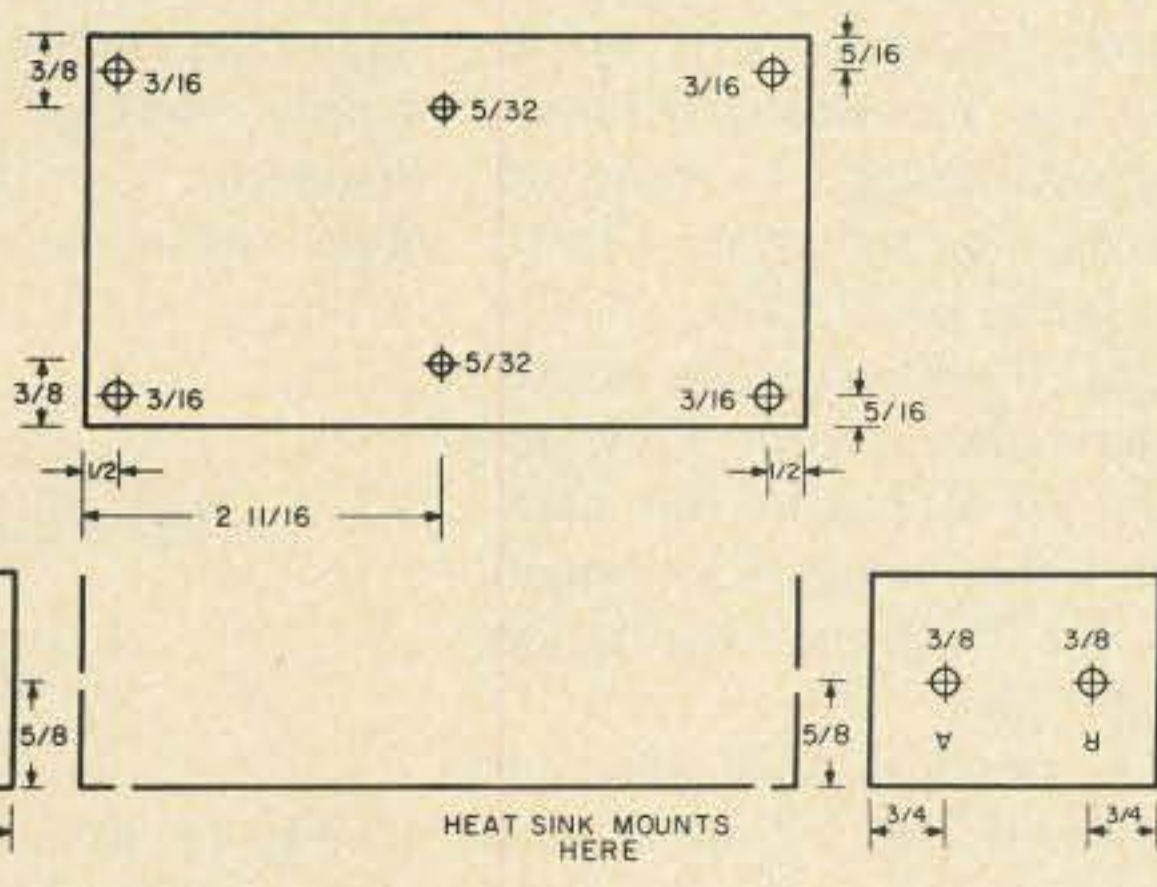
ATV 10 Watt amplifier chassis drill guide. Notes: All dimensions are in inches. All measurements are from outside edge of chassis. Chassis is LMB #139. Guide is not drawn to scale.
